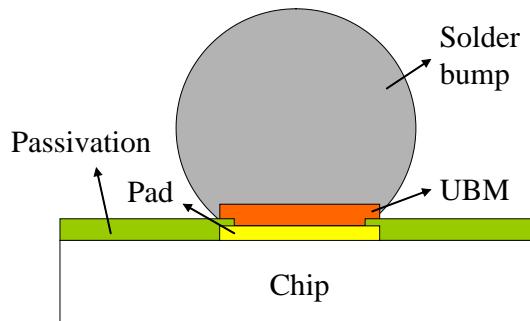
The schematic of a solder bump on the chip pad via UBM metal.
